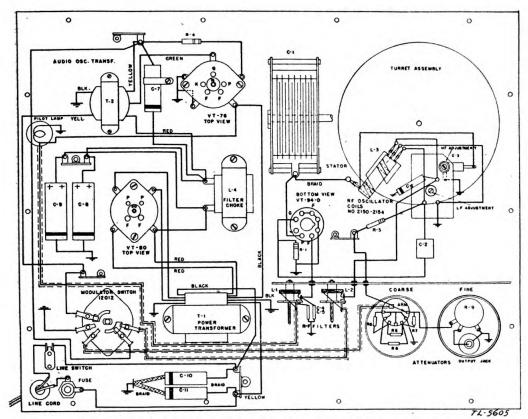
Signal generator I-72-H-practical wiring diagram.
